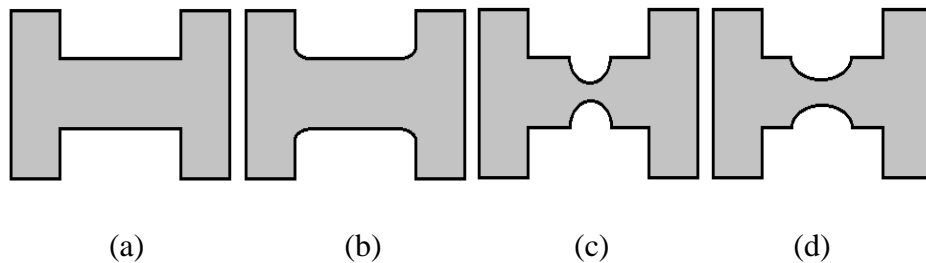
Flexures type (a) Rectangular flexure (b) Corner fillet flexure (c) Circular cutout flexure (d) Elliptical cutout flexure
